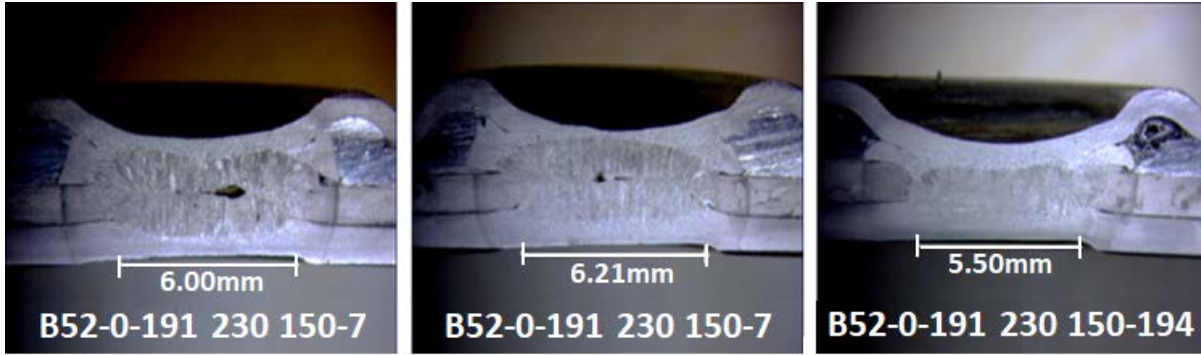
F.7. Results from the EL Trial – 1.2 mm 980MPa to 1.2 mm 980MPa to 3.0 mm Aural 2-T7 (6 mm pilot) – through the Dow 5055-C with R4-6GA-V rivet (left to right): Weld #7 Section, Weld #107 Section, and Weld #194 Section. Source: Arconic.
